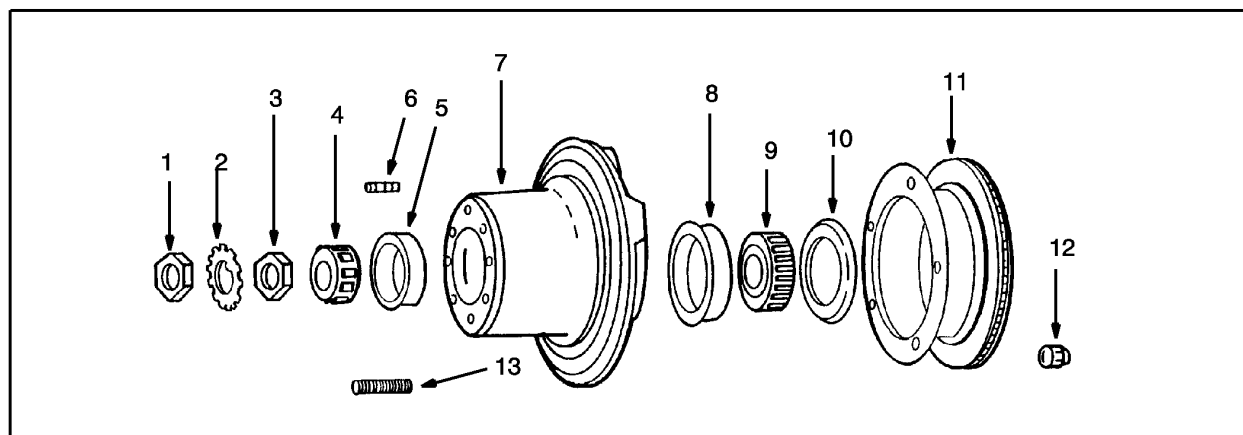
Exploded View of Typical Disc Type Rear Hub Assembly with Disc Brakes
